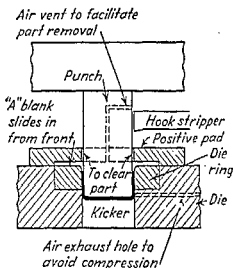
Simple form of drawing die for use with heavy stock.
